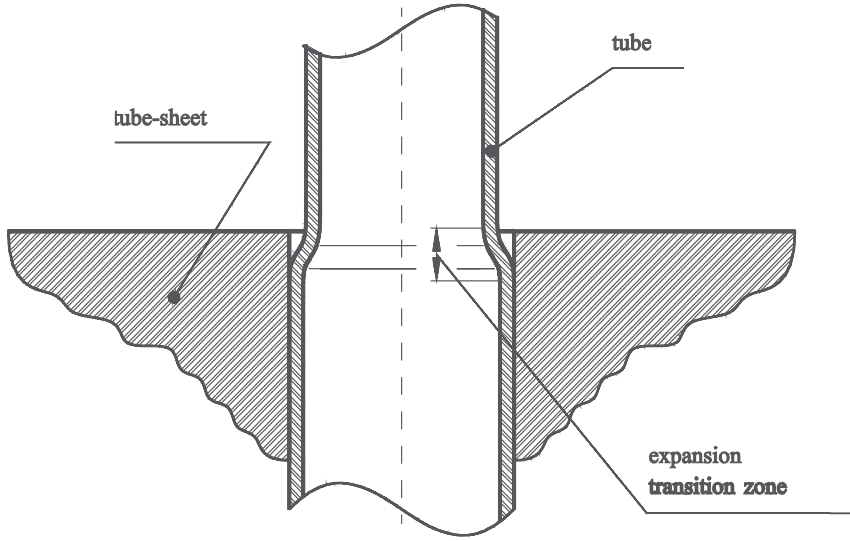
A tube expanded into a tube sheet: expansion transition zone
